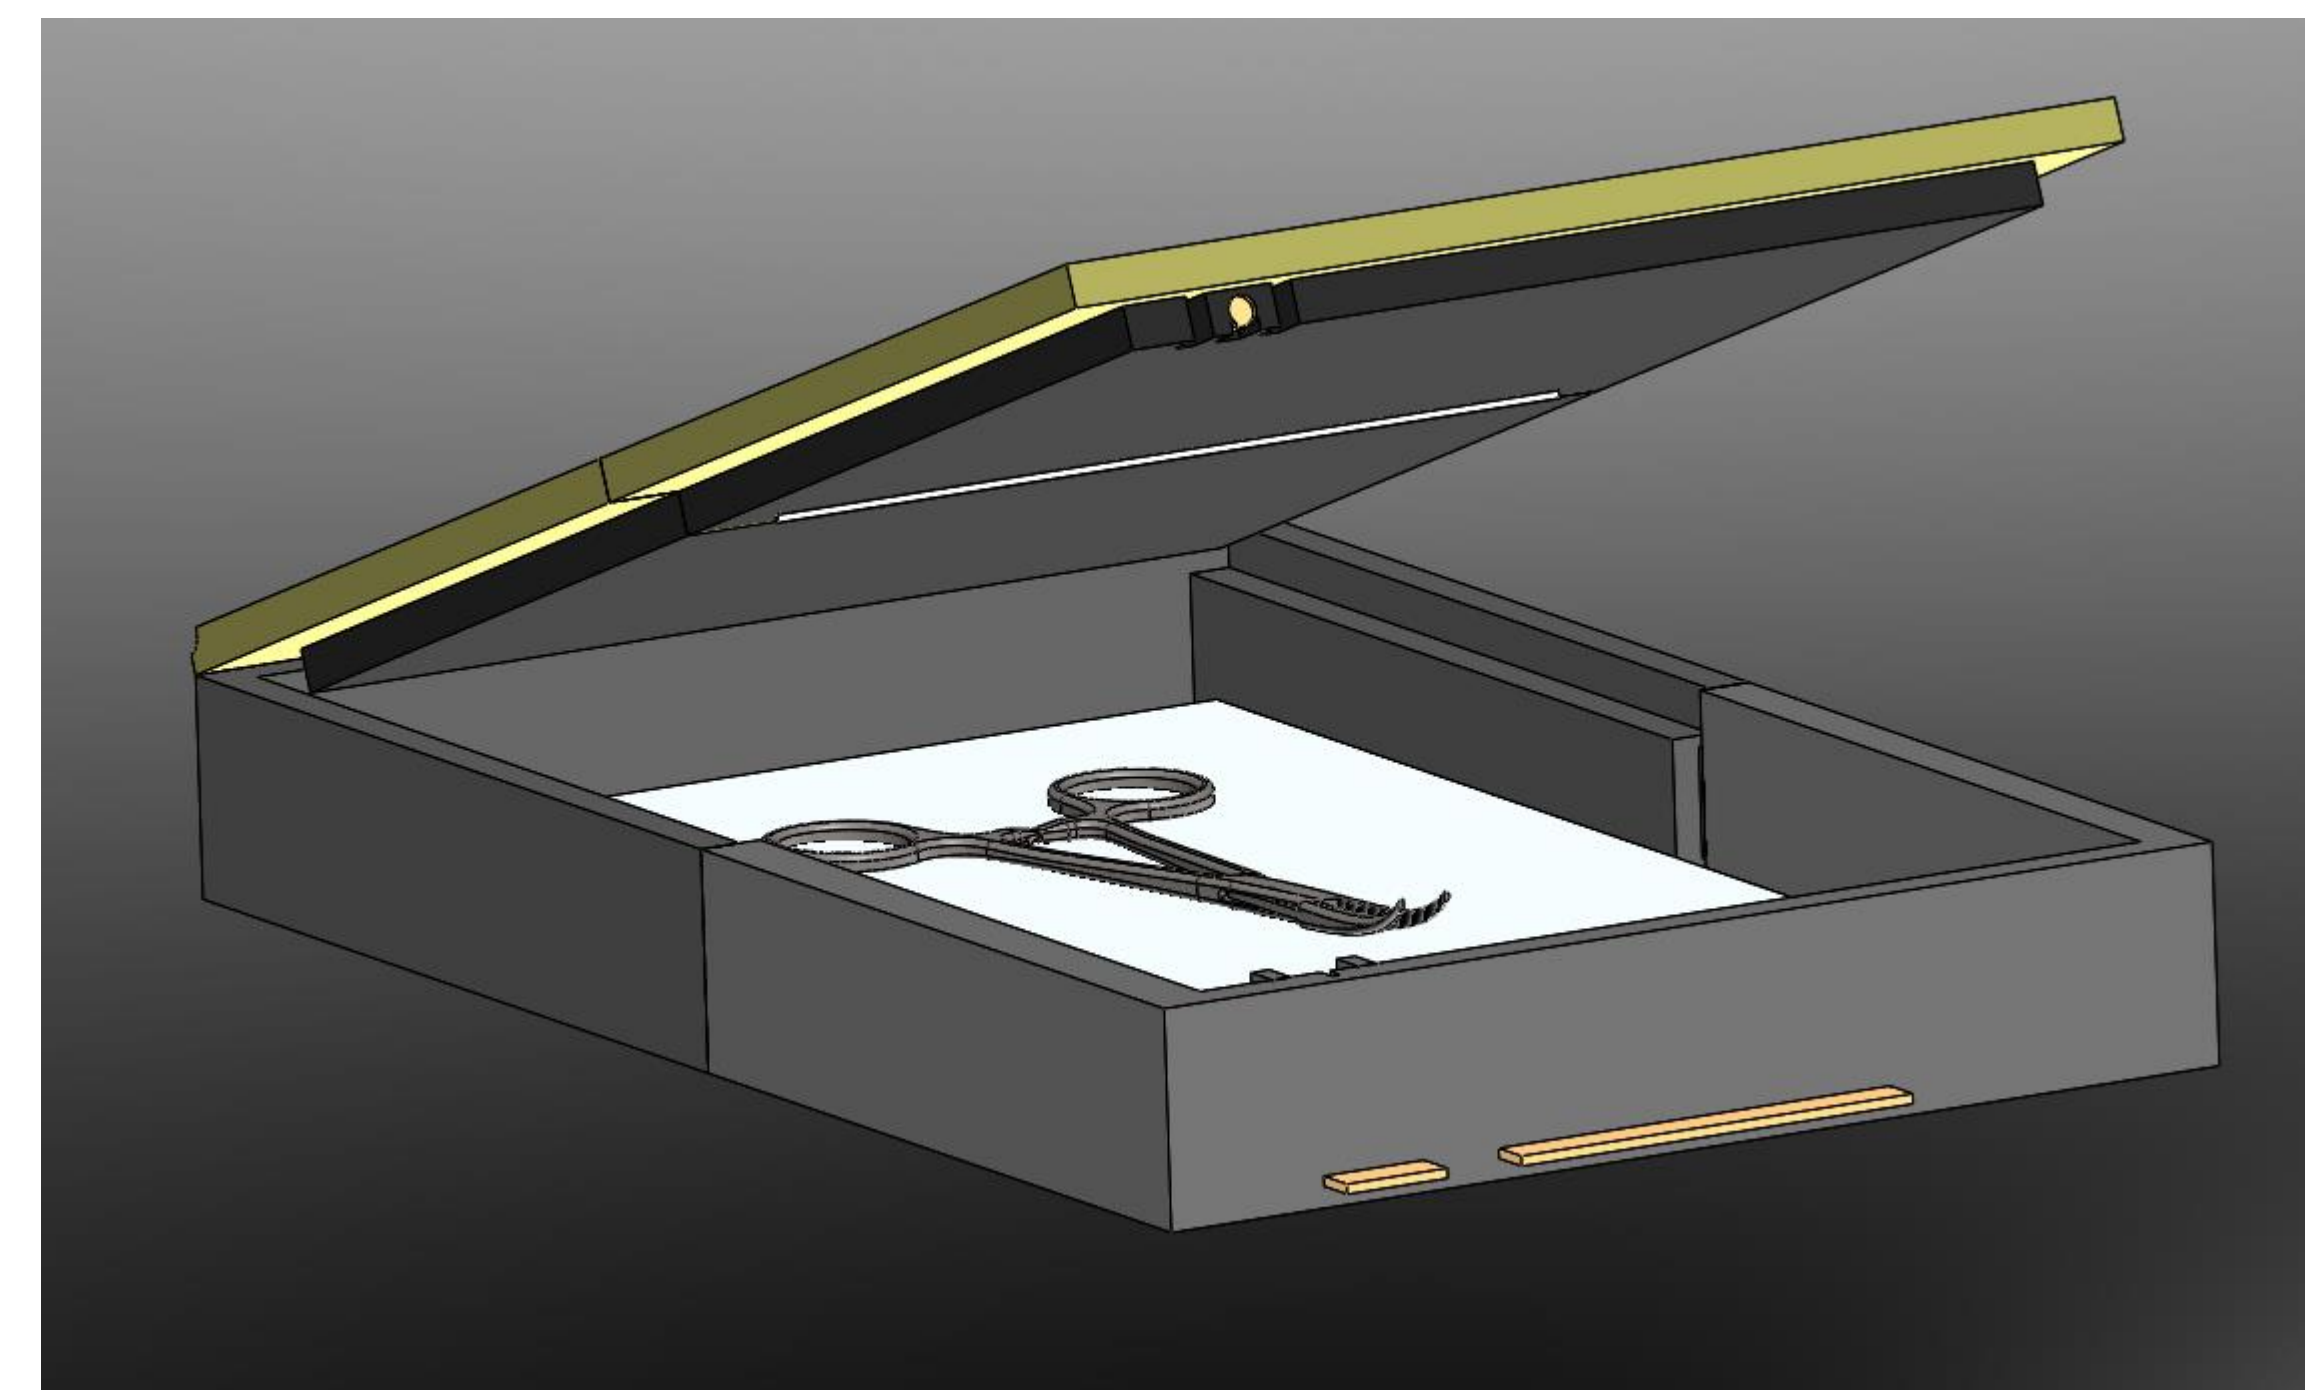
SolidWorks model showing the prototype configuration with a flat, metal tool
